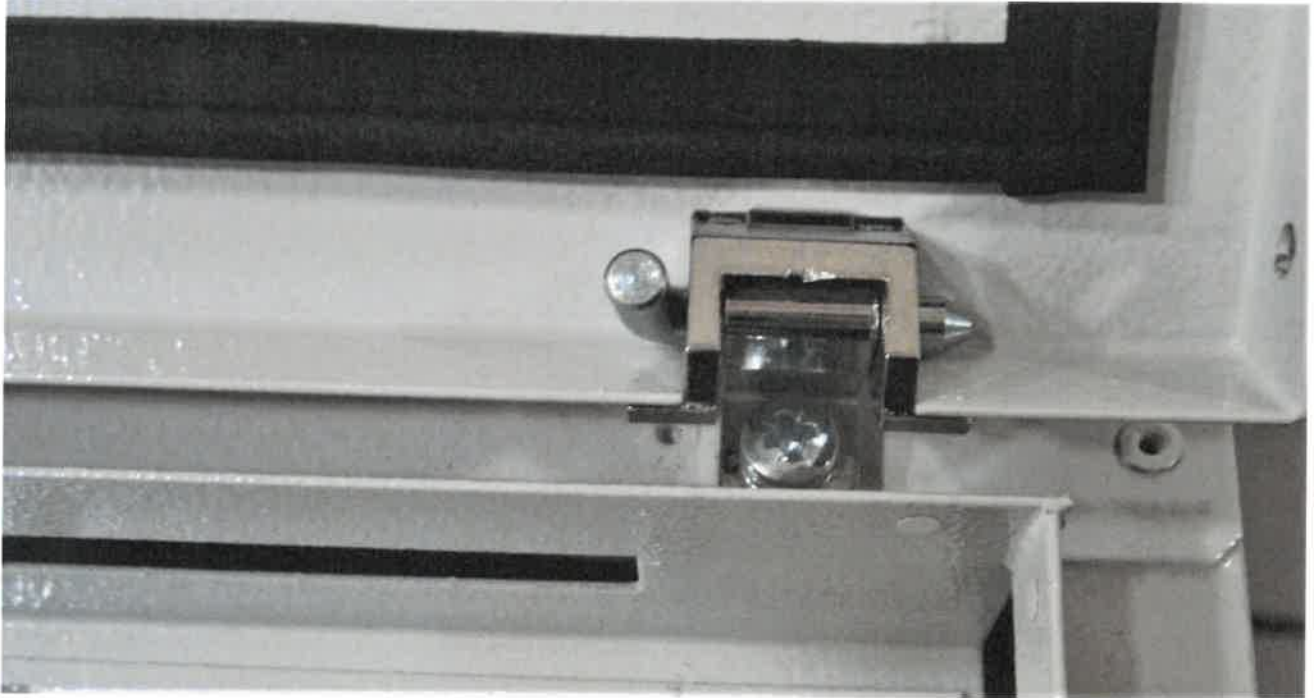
No visible damages (breakage and cracks) of enclosure on left side of the enclosure
